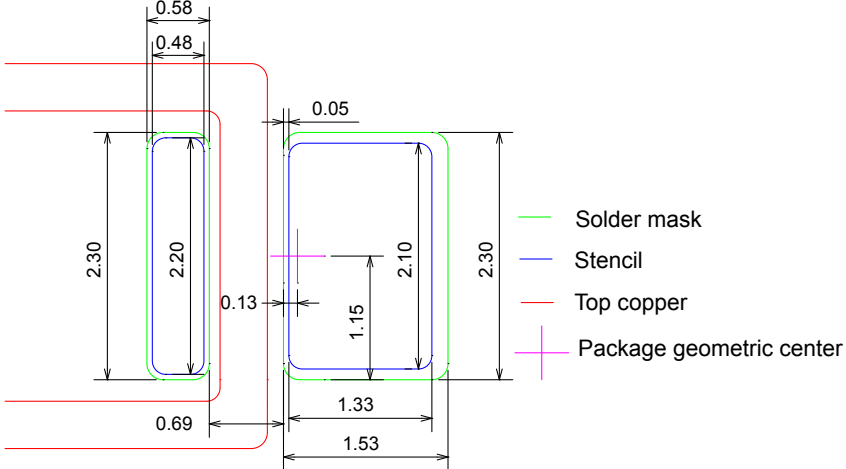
Recommended PCB solder pad layout for LUXEON 3030 2D Line.
